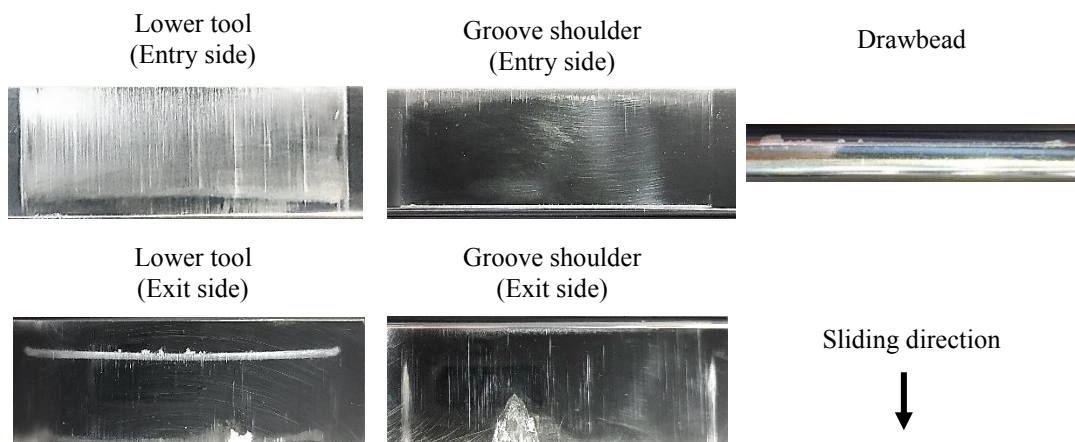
Overview of the surface structure of the drawbead tool tested with DP 980 and a 2mm bead penetration after 2606 strokes.
